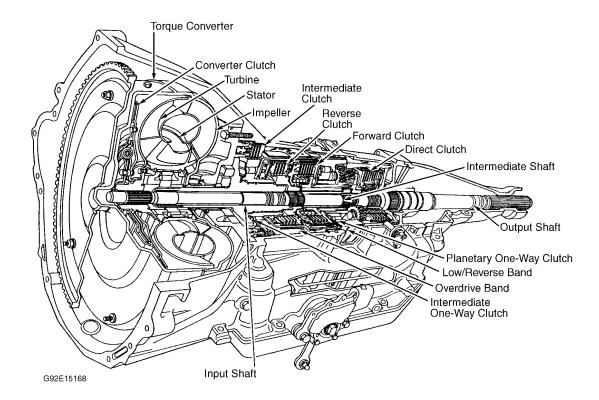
Cross-Sectional View Of 4R70W Courtesy of FORD MOTOR CO.
